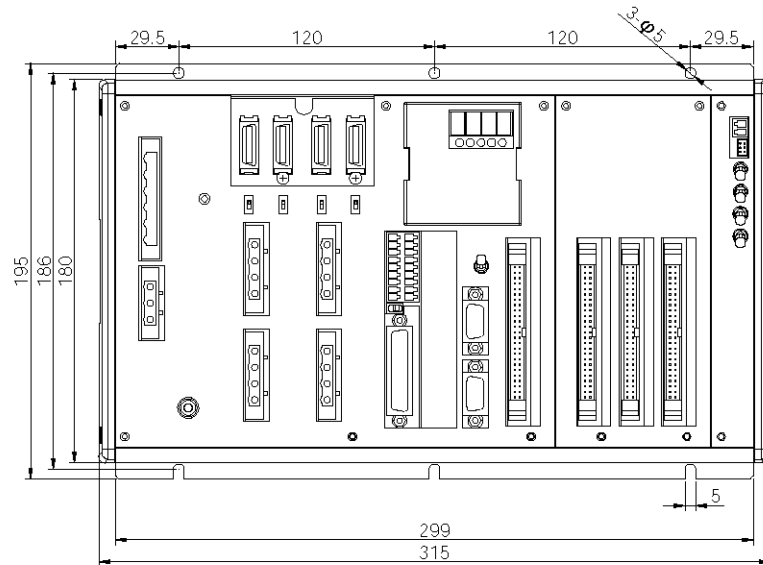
Q Type 4 axis Controller with Expansion I / O Board + Absolute Brake Unit
